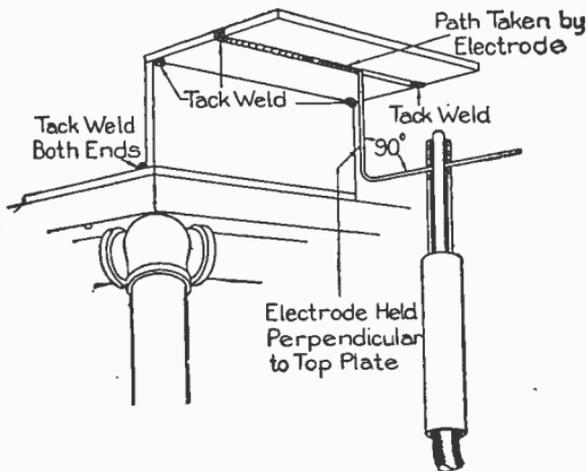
,104.—Lesson 15. Method of making an overhead straight butt weld.
